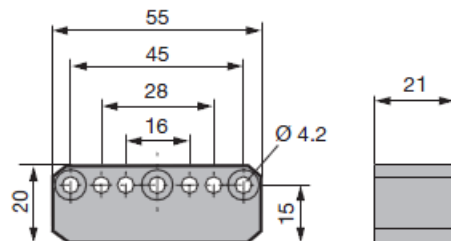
Installation dimensions of BTL5-P-5500-2 magnet
